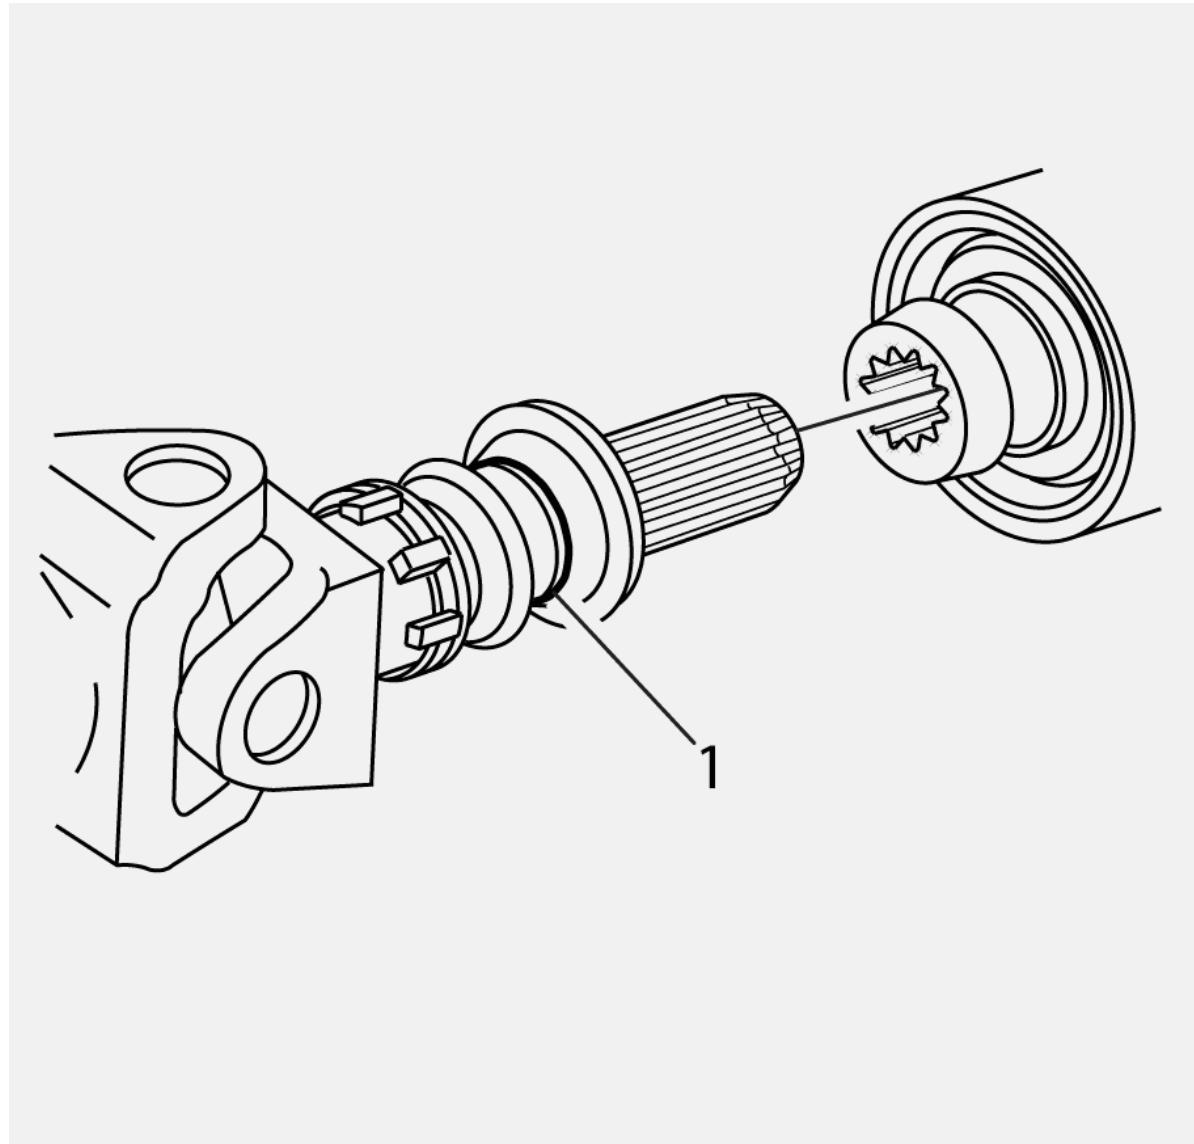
Boot, Groove & Transfer Case Output Shaft
